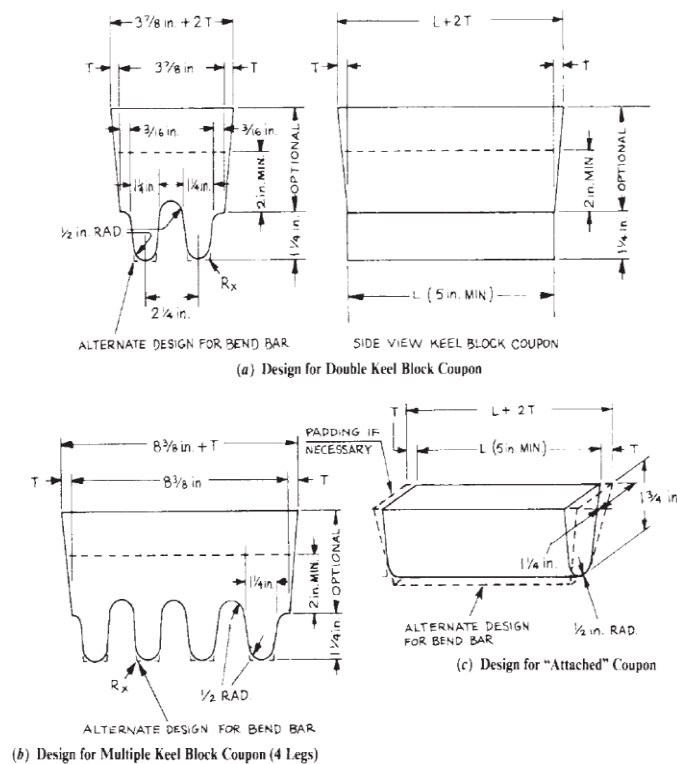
Test Coupons for Castings (see Table 1 for Details of Design)
